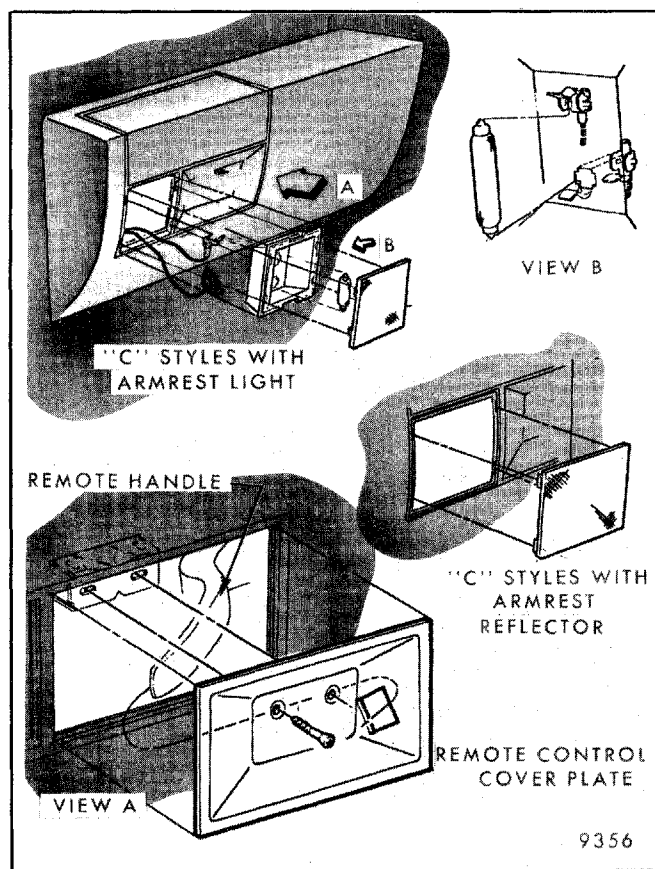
Typical Remote Control Handle Cover Plate and Courtesy Lamp - "C" Body Styles
